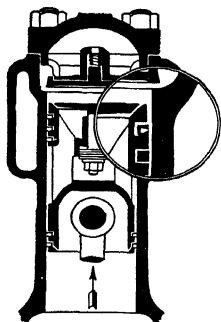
Pumping action of worn piston rings. (Courtesy Socony-Vacuum Oil Co.)
